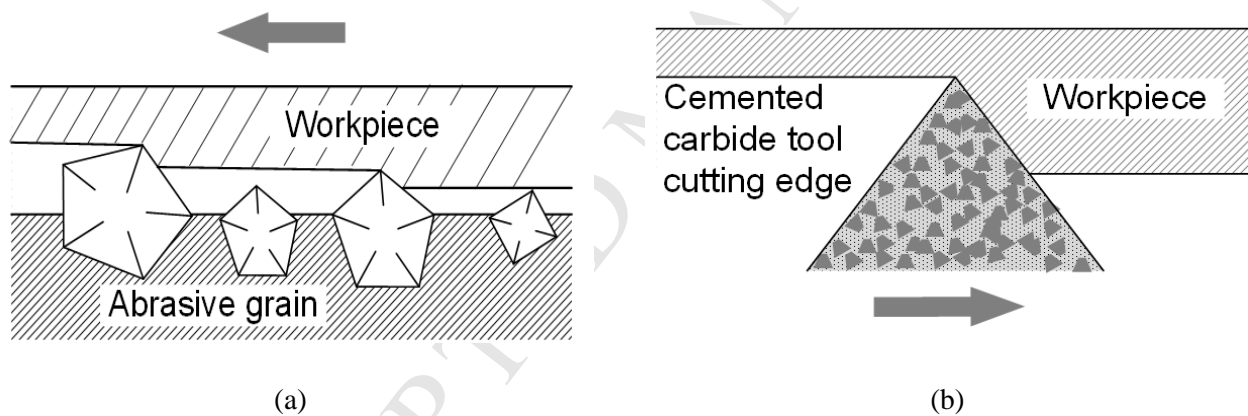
Schematic illustration of material removal in (a) abrasive machining processes (where CBN composite is used as cutting tool); (b) chip-removal machining processes (where cemented carbide is used as cutting tool).
